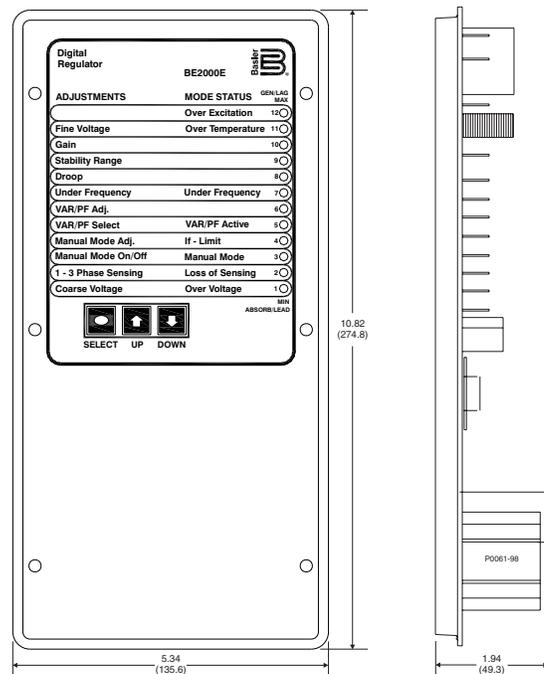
BE2000E Dimensions in Inches (Millimeters)
